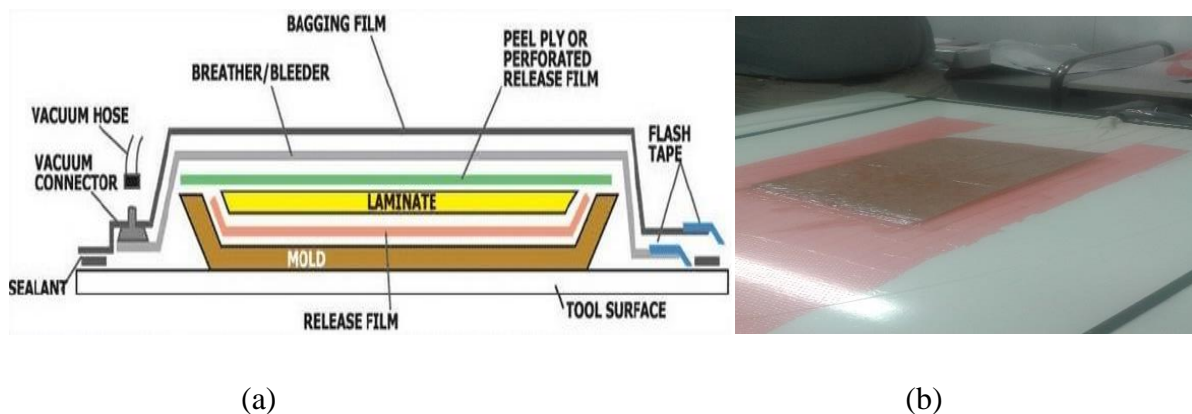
(a) typical Vacuum bagging layup schematic. Taken from: (Craft, 2014) and (b) vacuum bagging setup
